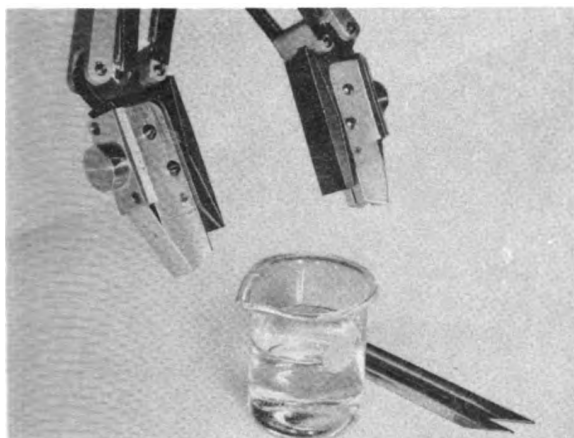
Fixtures for plug-in fingers mounted on manipulator jaws.
